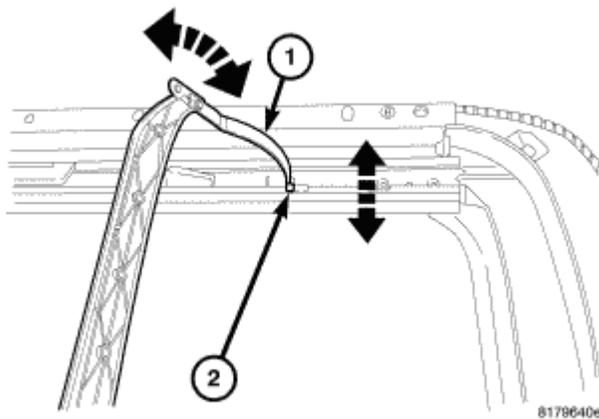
Rotating Wind Deflector Up And Release From Mounting Hole In Sunroof Frame
